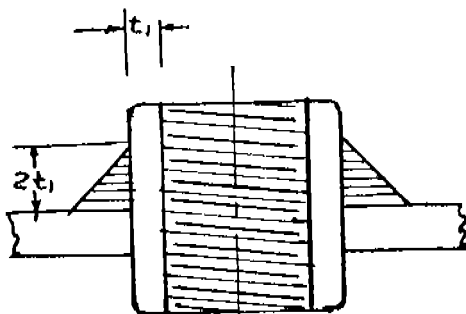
TYPICAL MILD STEEL DISTANCE PIECE FOR MOUNTINGS
